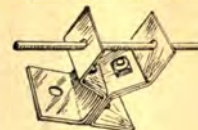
Arrangement of Angles to produce a bearing for a shaft.
